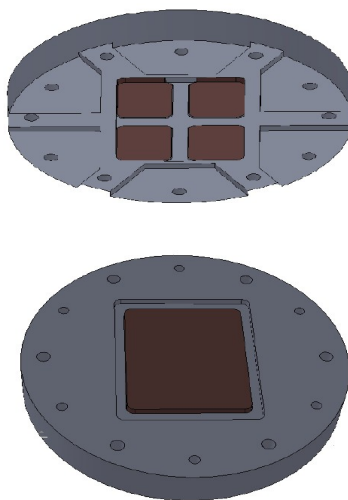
Exploded view of the electrode assembly. All parts are fabricated from OFHC copper. The electrode holders are shaded gray to indicate that the electrodes are not electrically connected to the holders.
